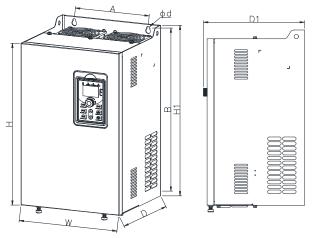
30~220kW G3 Dimension (Frame No.: A5~A11, A19)
